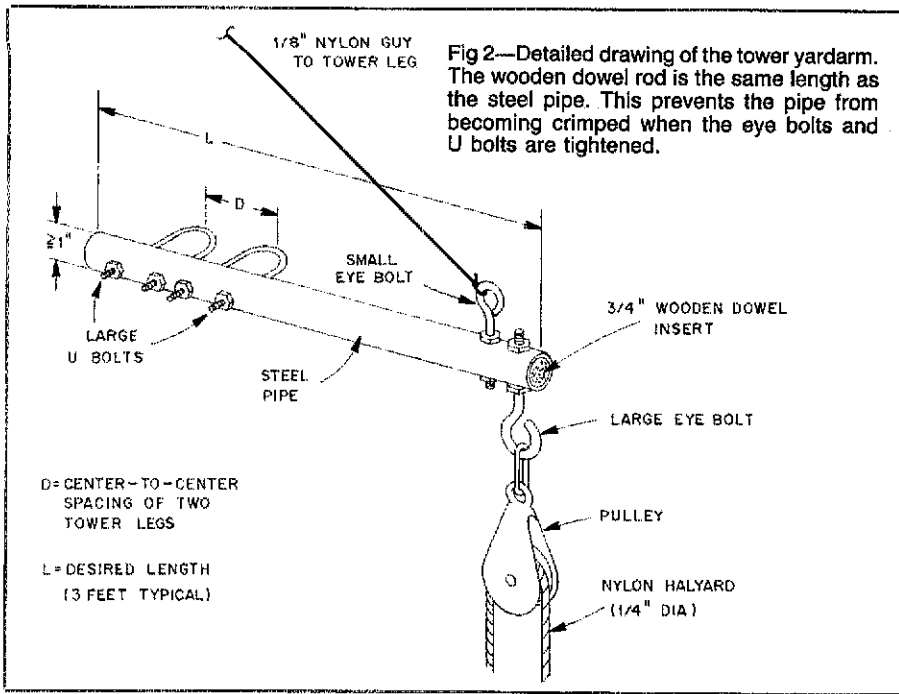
Detailed drawing of the tower yardarm. The wooden dowel rod is the same length as the steel pipe. This prevents the pipe from becoming crimped when the eye bolts and U bolts are tightened.
